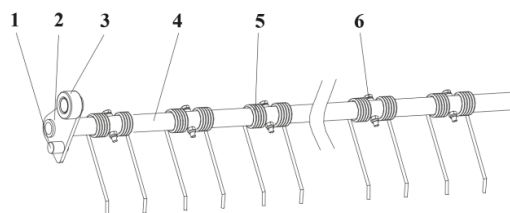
A schematic diagram of the hook and tooth assembly structure: 1. Limit short shaft; 2. Guide side plate; 3. Roller; 4. Hook tooth mounting shaft; 5. Hook tooth; 6. Threaded fastener.
